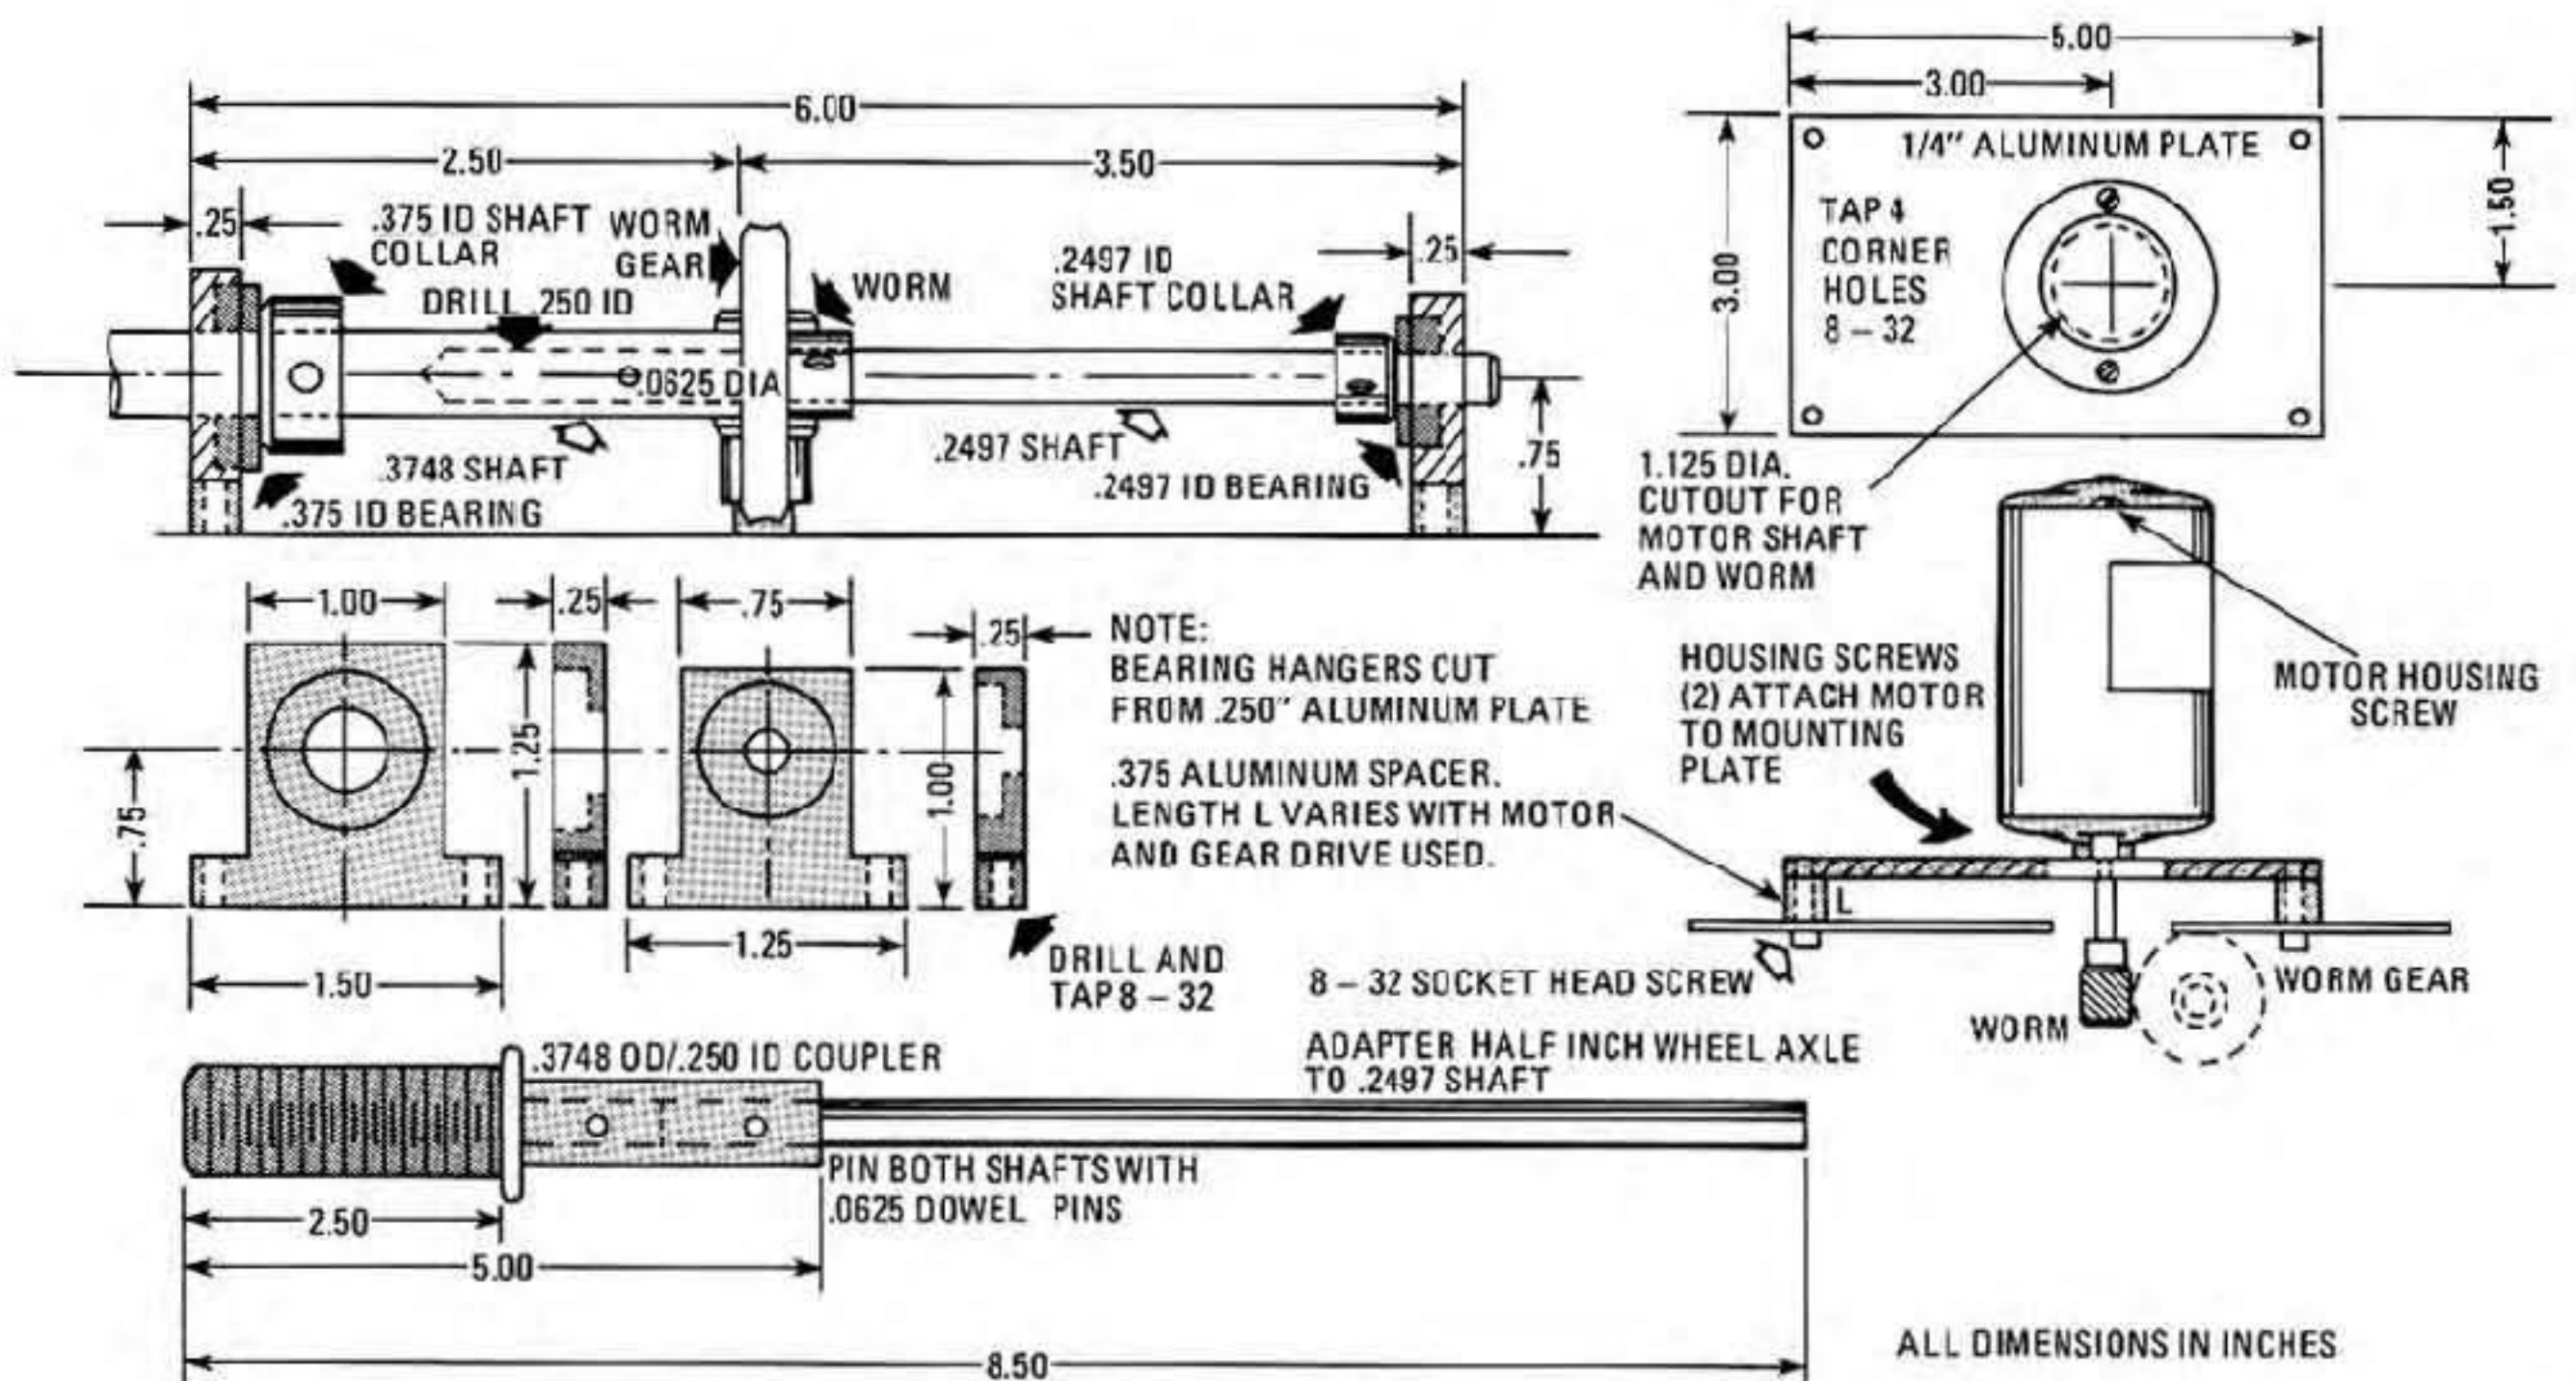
MORE COMPLEX DRIVE MECHANISM is shown above. Power is transmitted to wheels through right angles, by means of worms. Gear motor drive is simpler and more reliable.
